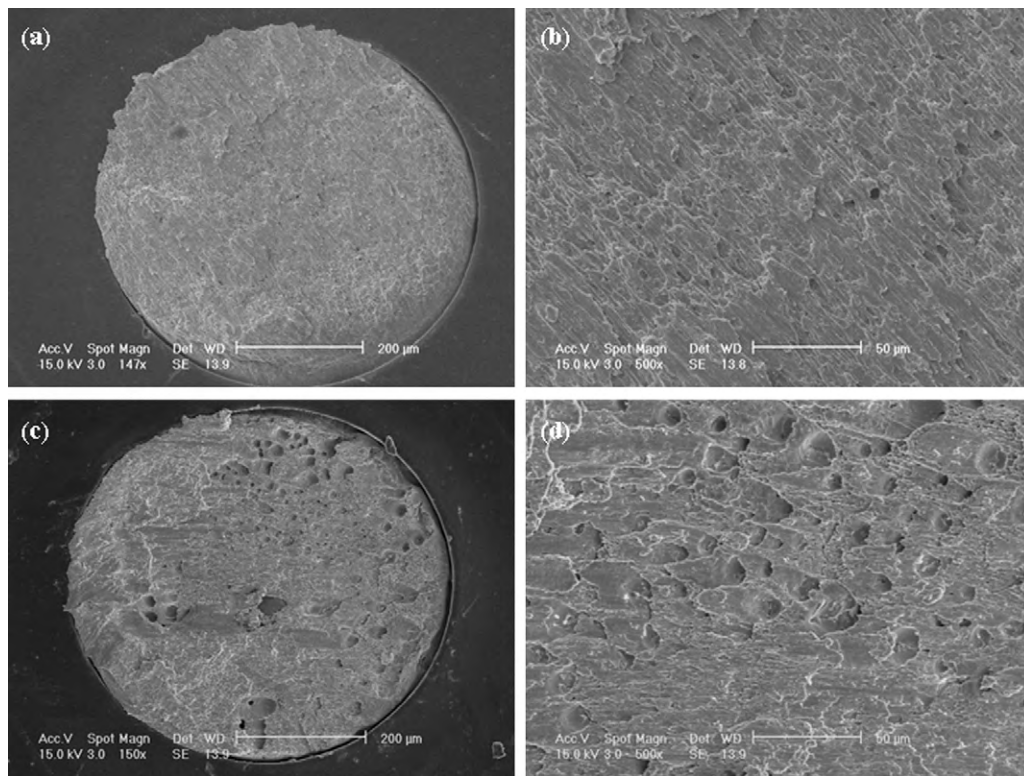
SEM fracture surfaces of (a and b) Sn–Ag–Cu solder joints and (c and d) solder joints containing 3 wt% Al nano-particles after one reflow cycle.
